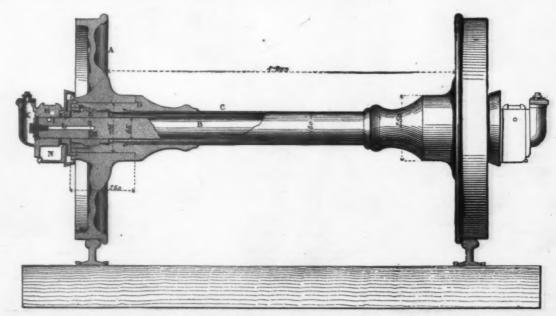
WHEEL-FLANGE LUBRICATOR.
